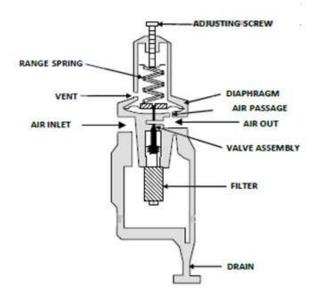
Construction of Pneumatic Air Regulator Valve
